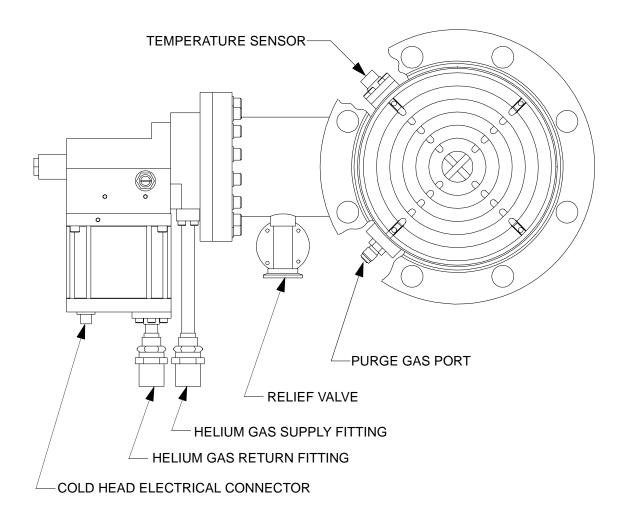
Gas/Electrical Components on a Typical Cryo-Torr Cryopump
